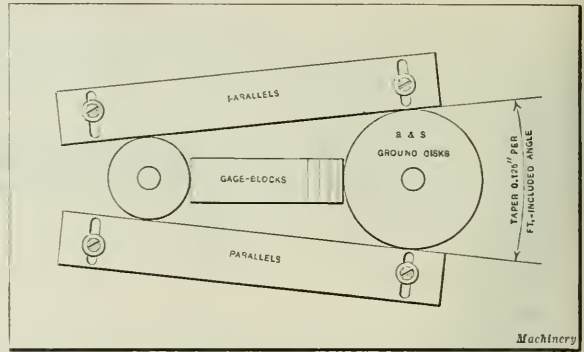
Set-up of Parallels, Disks, and Gage-blocks to test the Taper of the Gage shown at W, Fig. 7
